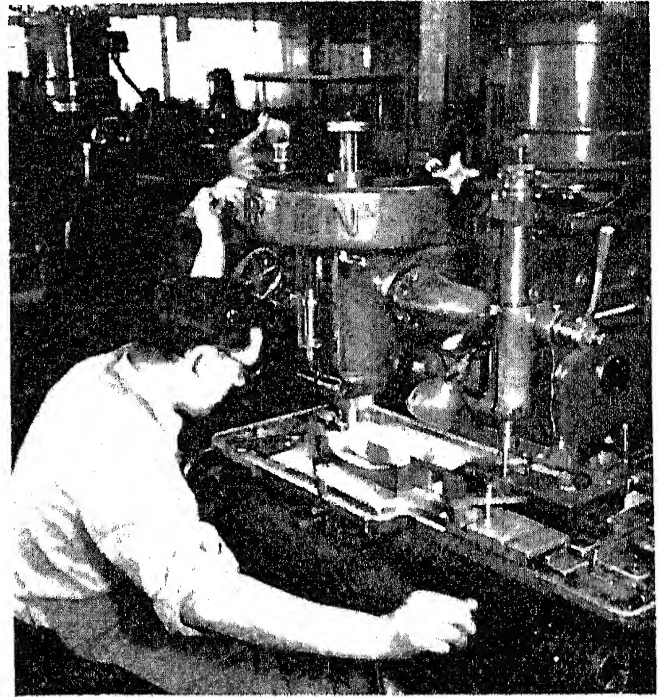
A form being duplicated by hand manipulation. (Courtesy Geo. Gorton Machine Co.)
